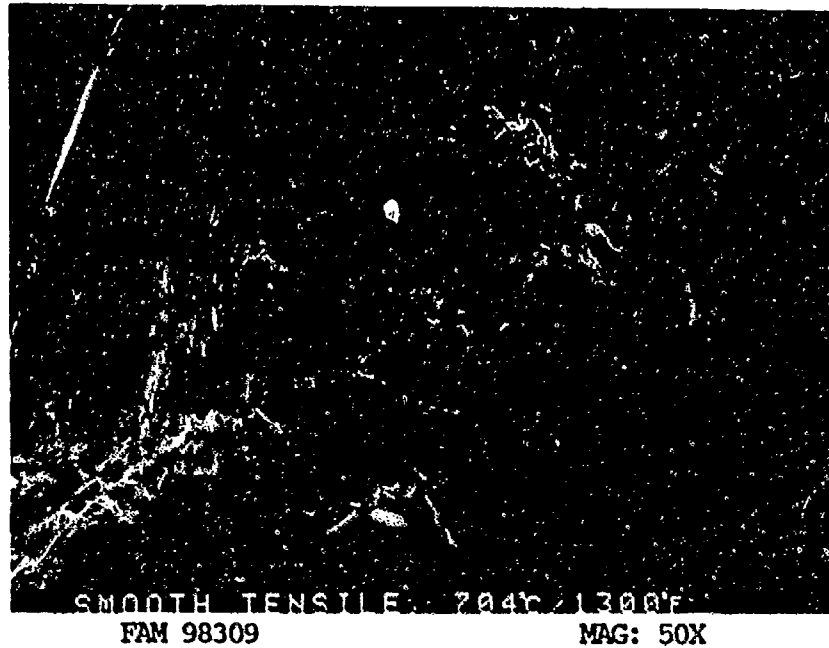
Dimpled overstress with secondary cracking. No shear lip is visible. Tensile dimples extend all the way to the edge of the specimen.
